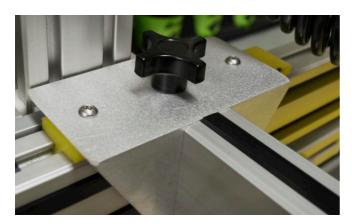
Rear slide mount of dibbler assembly and locking handle.
